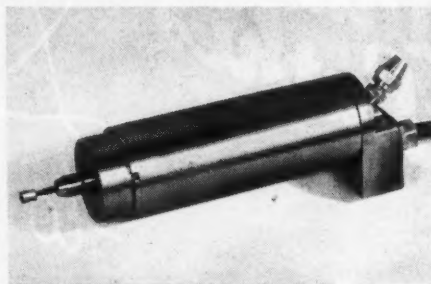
Ex-Cell-O High-cycle Grinding Spindle with Chuck and Mounted Wheel
